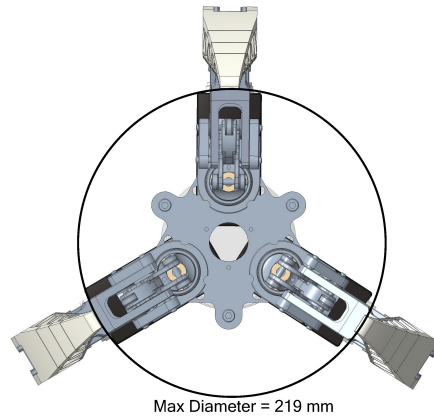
Gripper bottom view showing maximum grasping diameter
